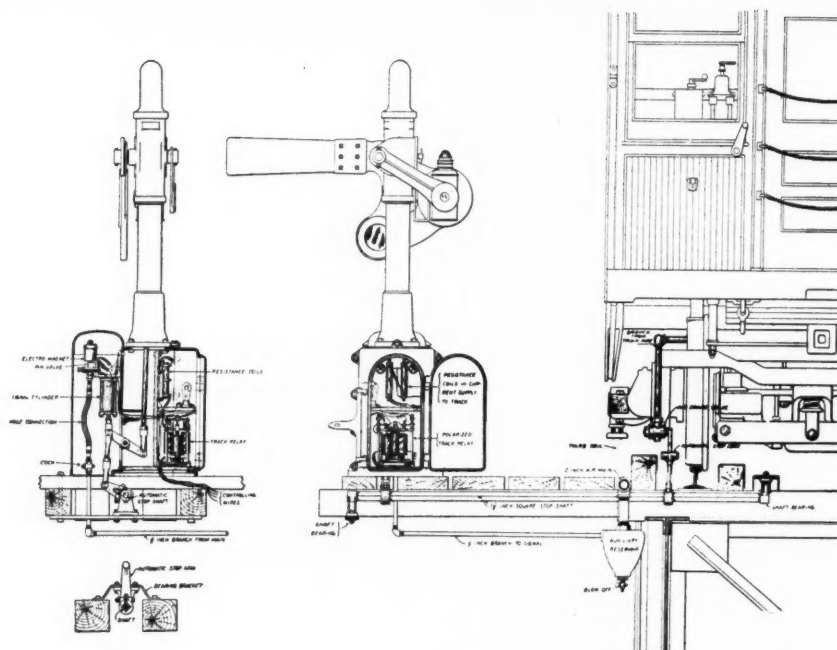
Automatic Block Signal and Stop on Elevated Structure. Boston Elevated.
